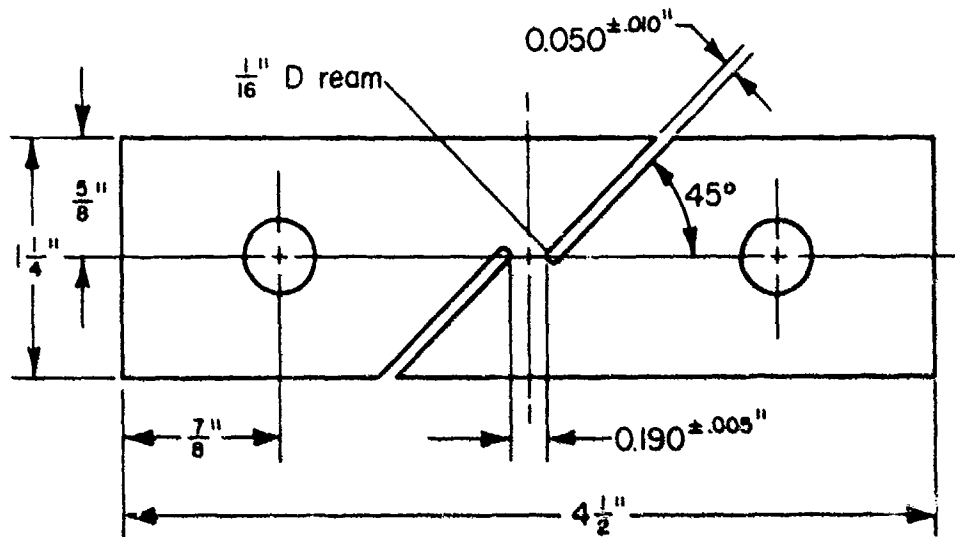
SHEET SHEAR TEST SPECIMEN
